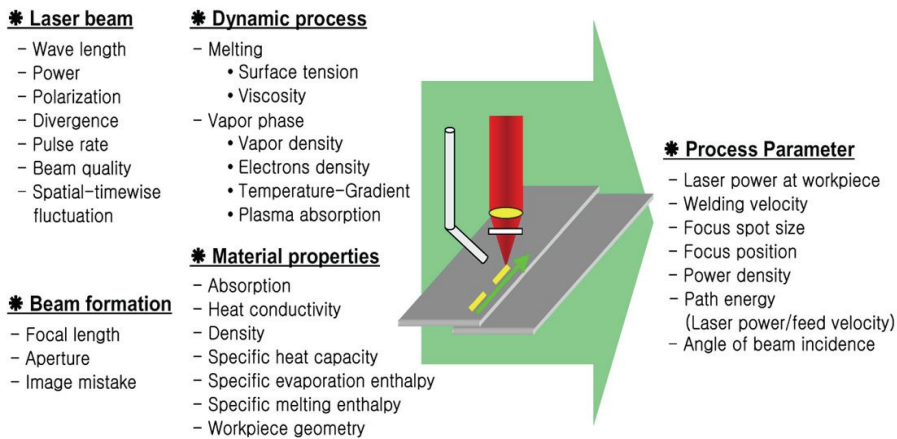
Important influential variables of Laser Welding process
